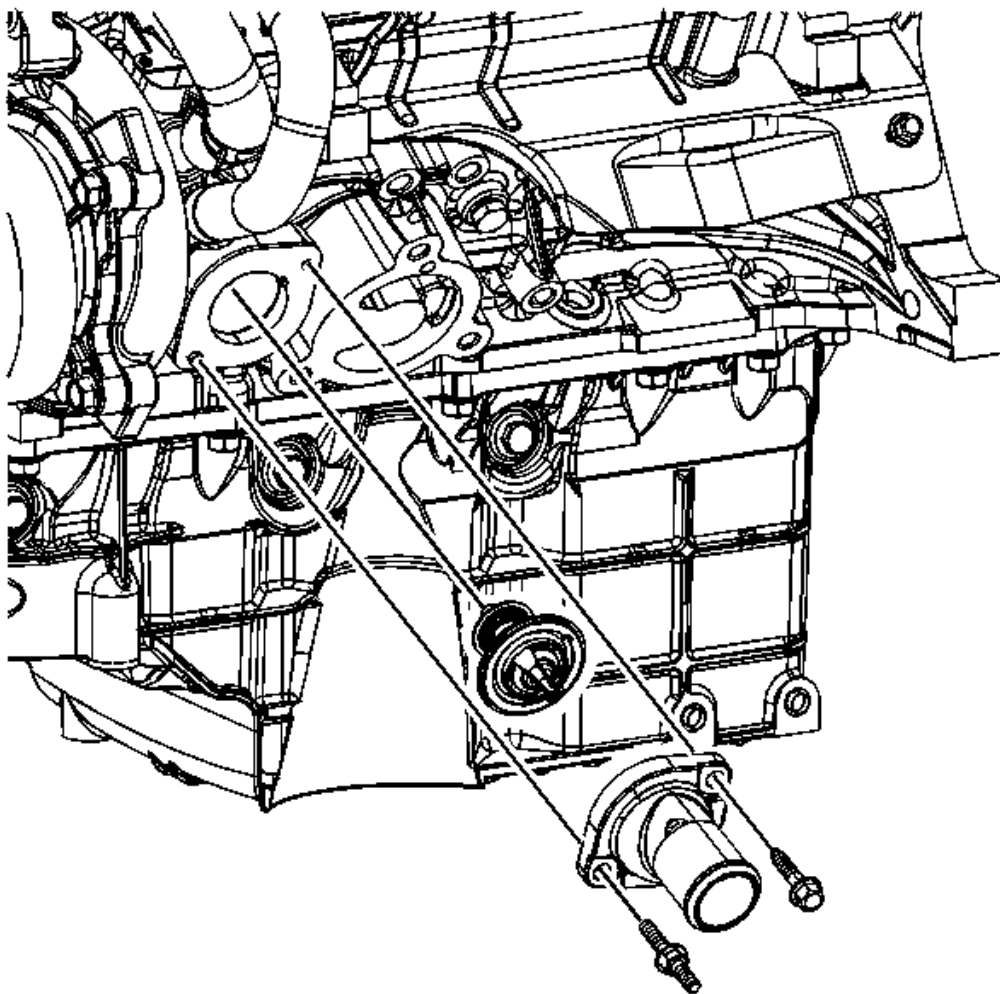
Identifying Thermostat Housing & Bolt/Stud
